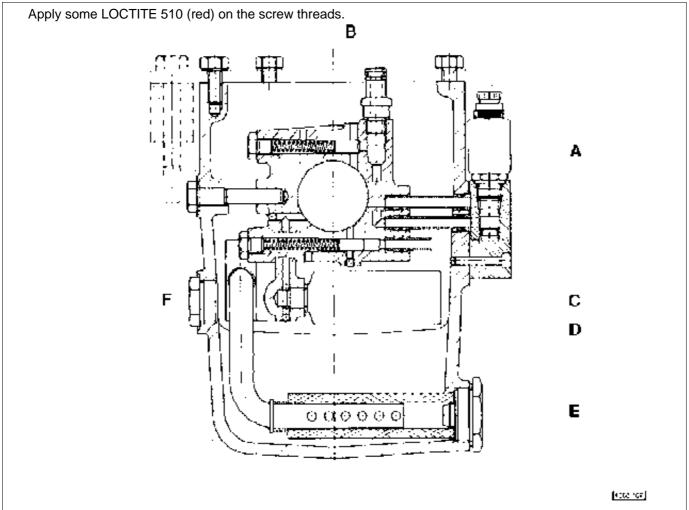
Longitudinal section of the front P.T.O. assembly.
